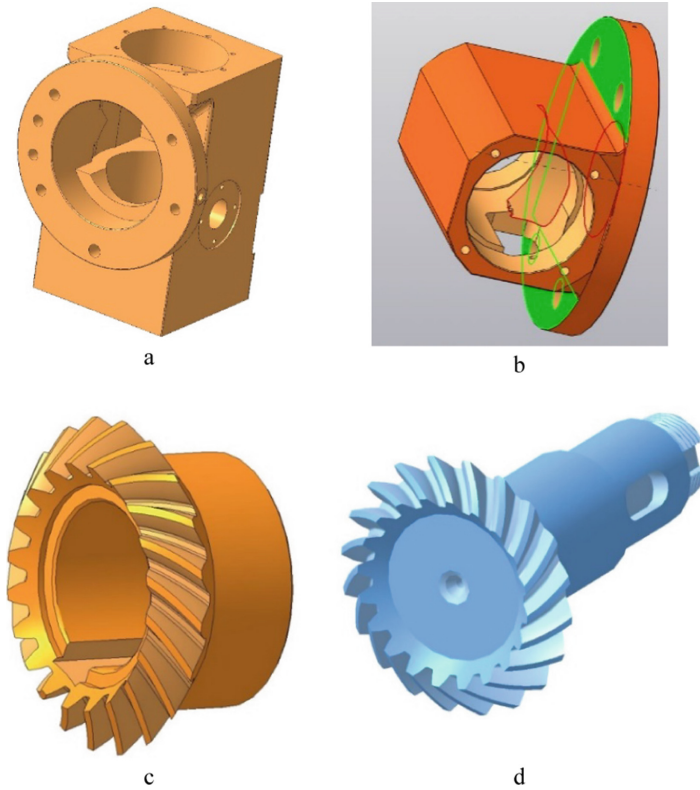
Solid models of machine drive parts: a – VSH housing; b – ASH housing; c – bevel gear; d – bevel pinion shaft
